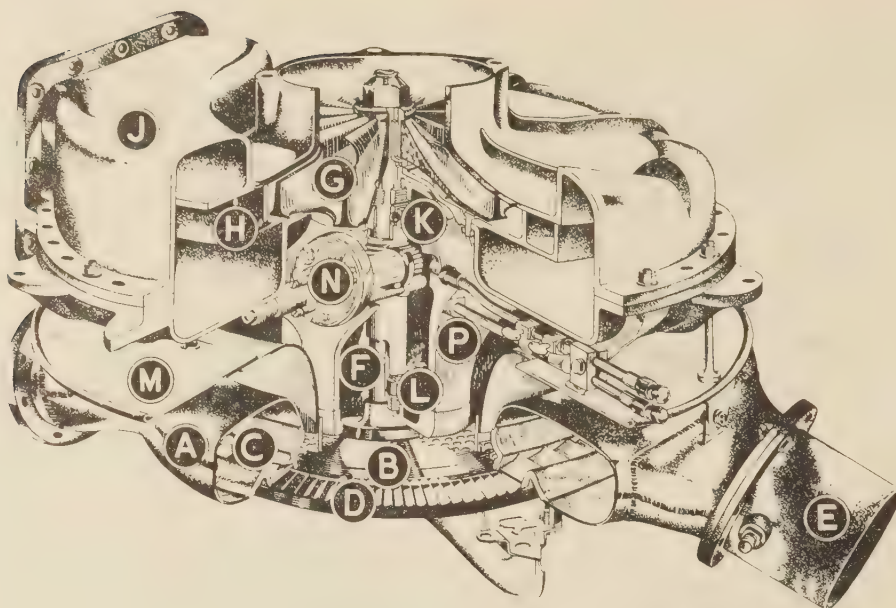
CUTAWAY VIEW OF TURBOSUPERCHARGER
